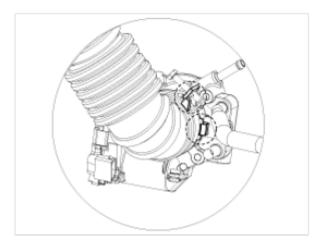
Identifying Air Intake Hose Installation Position Courtesy of HYUNDAI MOTOR AMERICA
